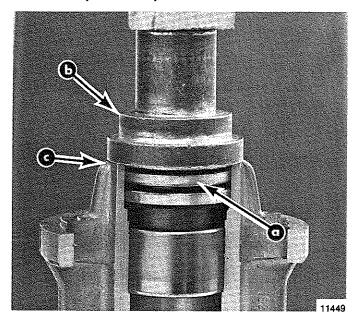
Propeller Shaft Seal Oil Seal Installation (Inner Seal)
